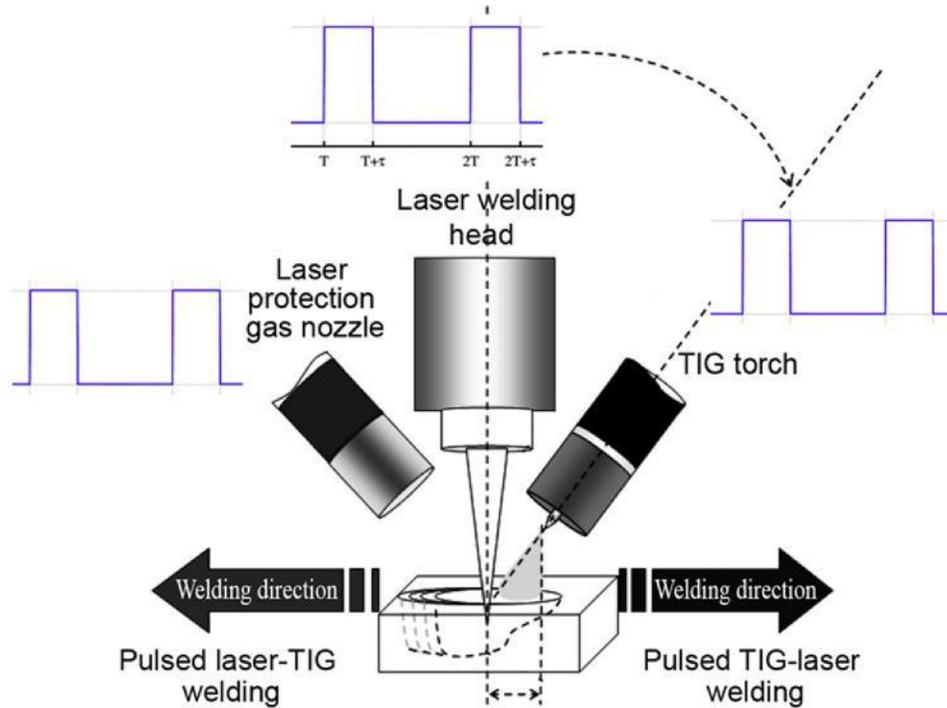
Pulsed laser-(micro) hybrid welding principle [148].
